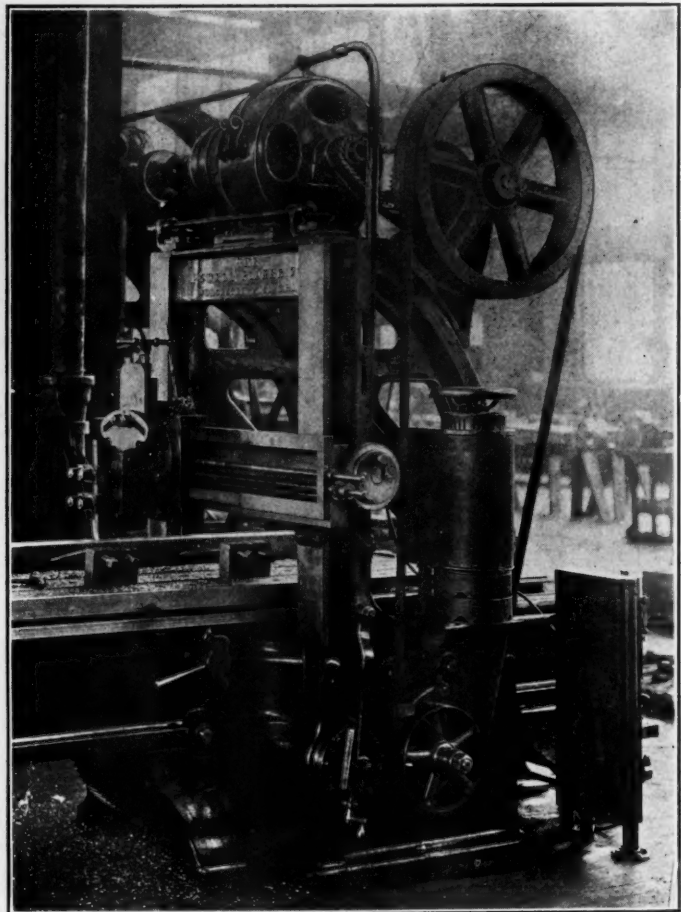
THE CHAIN DRIVE UPON THE 30-IN. POWELL PLANER, SHOWING CONVENIENT ARRANGEMENT OF CONTROLLER.—
